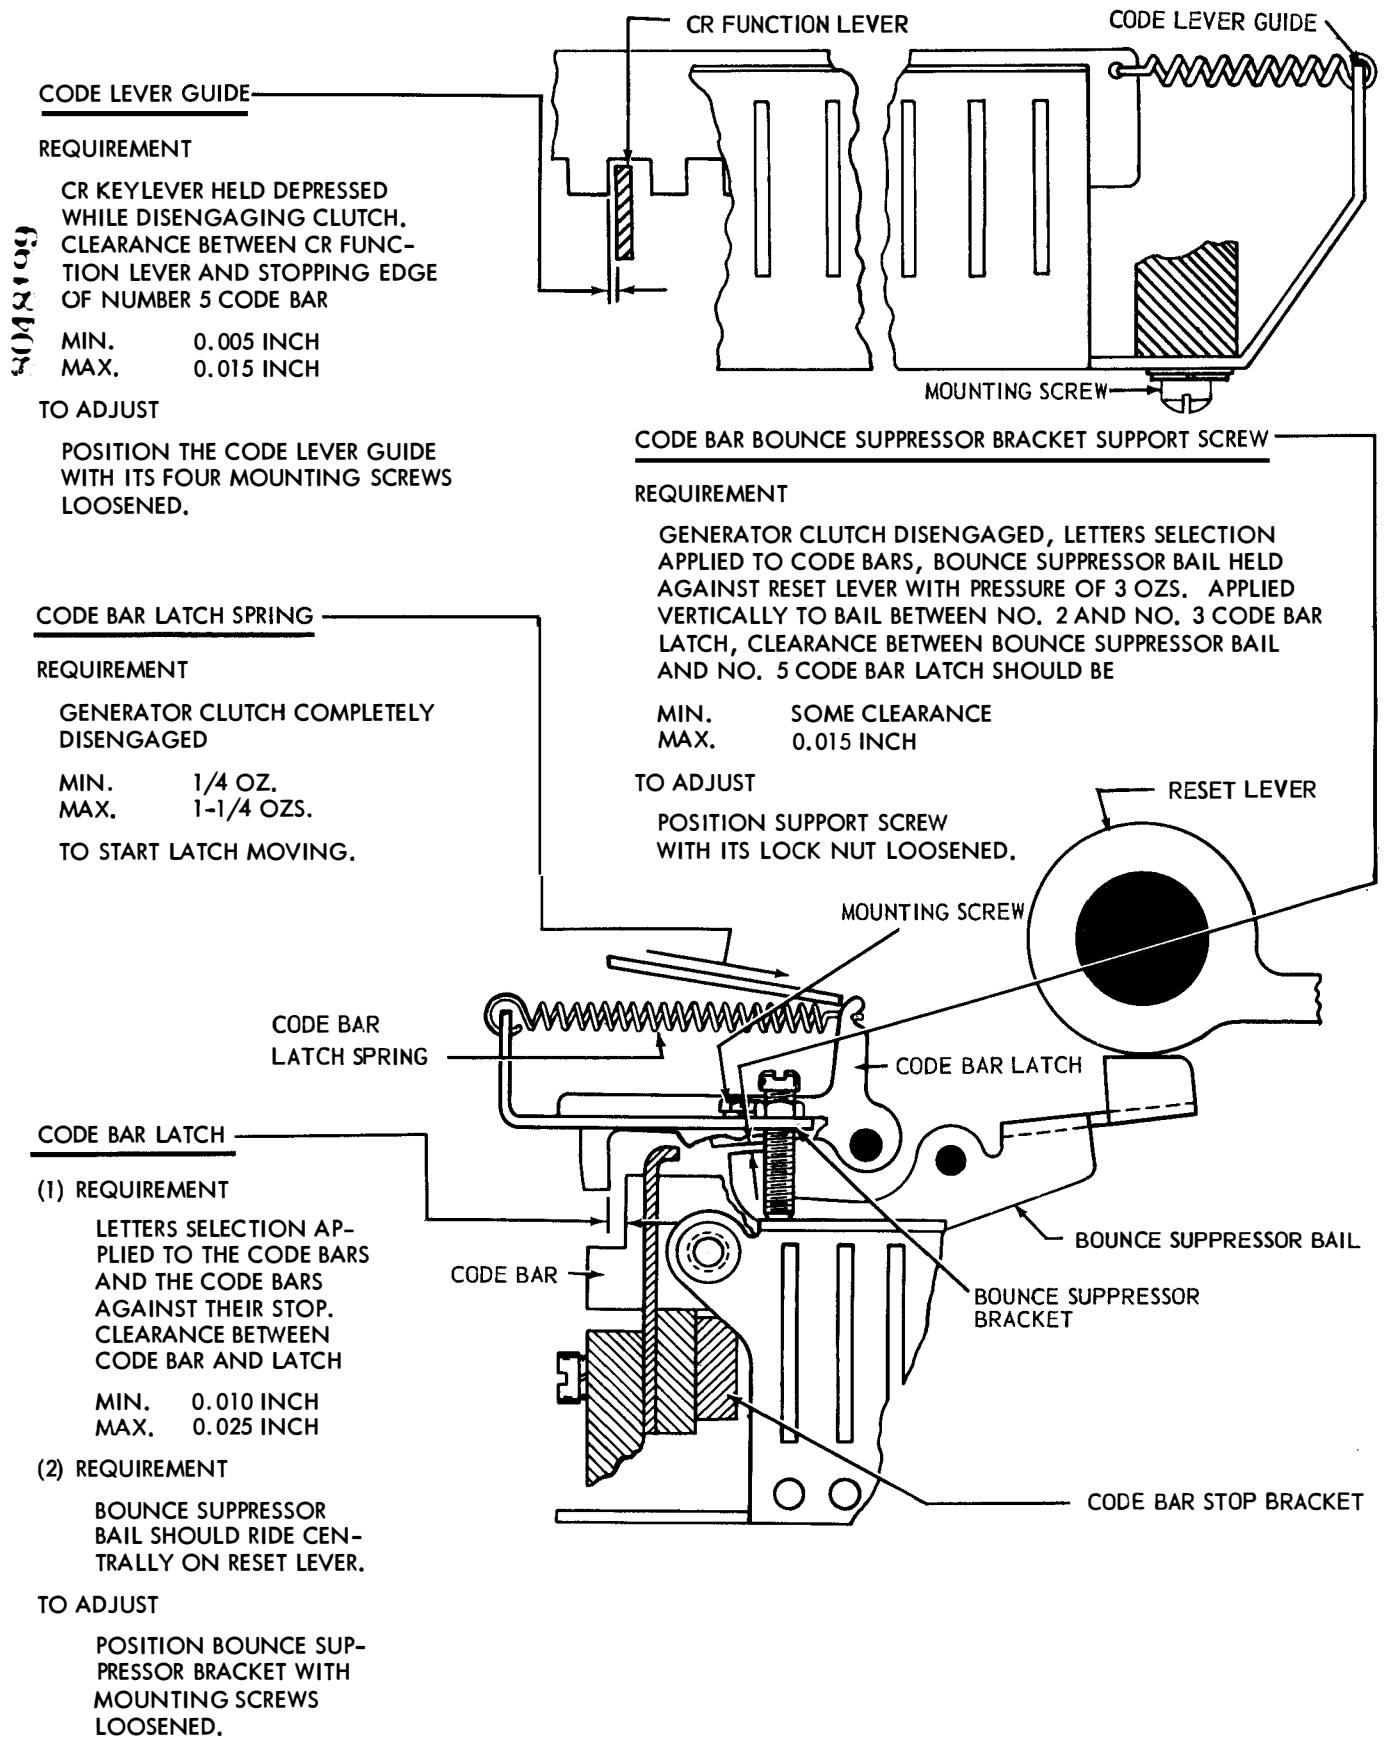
Keyboard, Code Bar Mechanism, Front View
